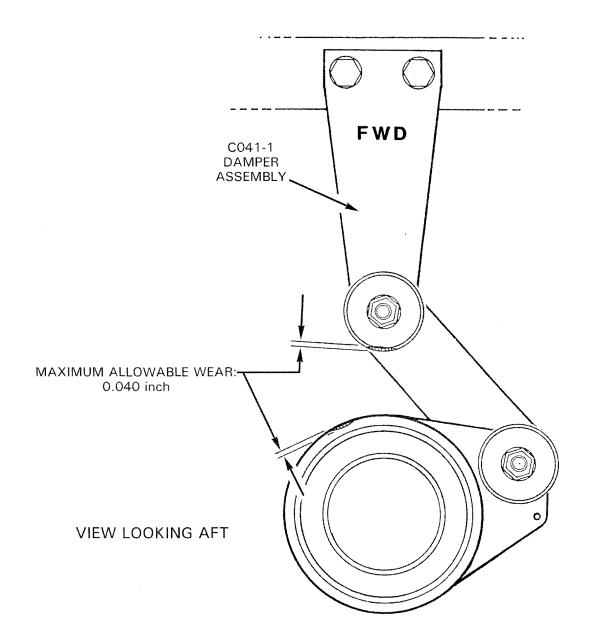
TAIL ROTOR DRIVE SHAFT DAMPER BEARING INSPECTION
